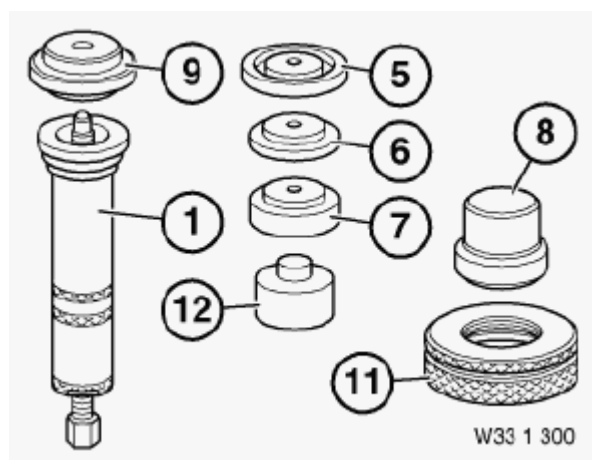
Rillex Tapered Roller Bearing Extractor (33 1 300)
